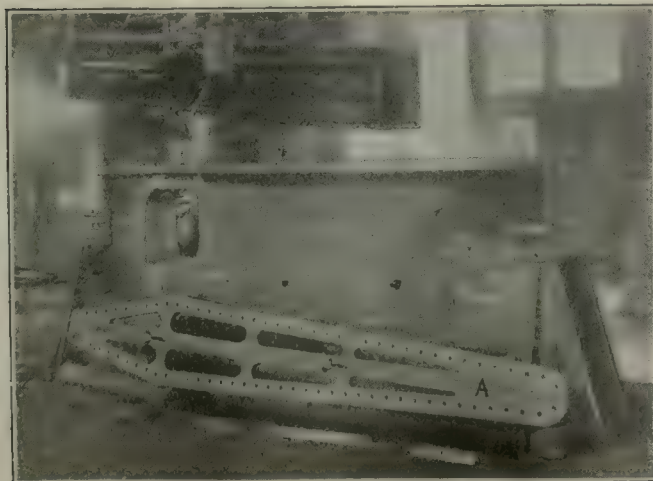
DRILLING AND COUNTERSINKING RIVET HOLES
